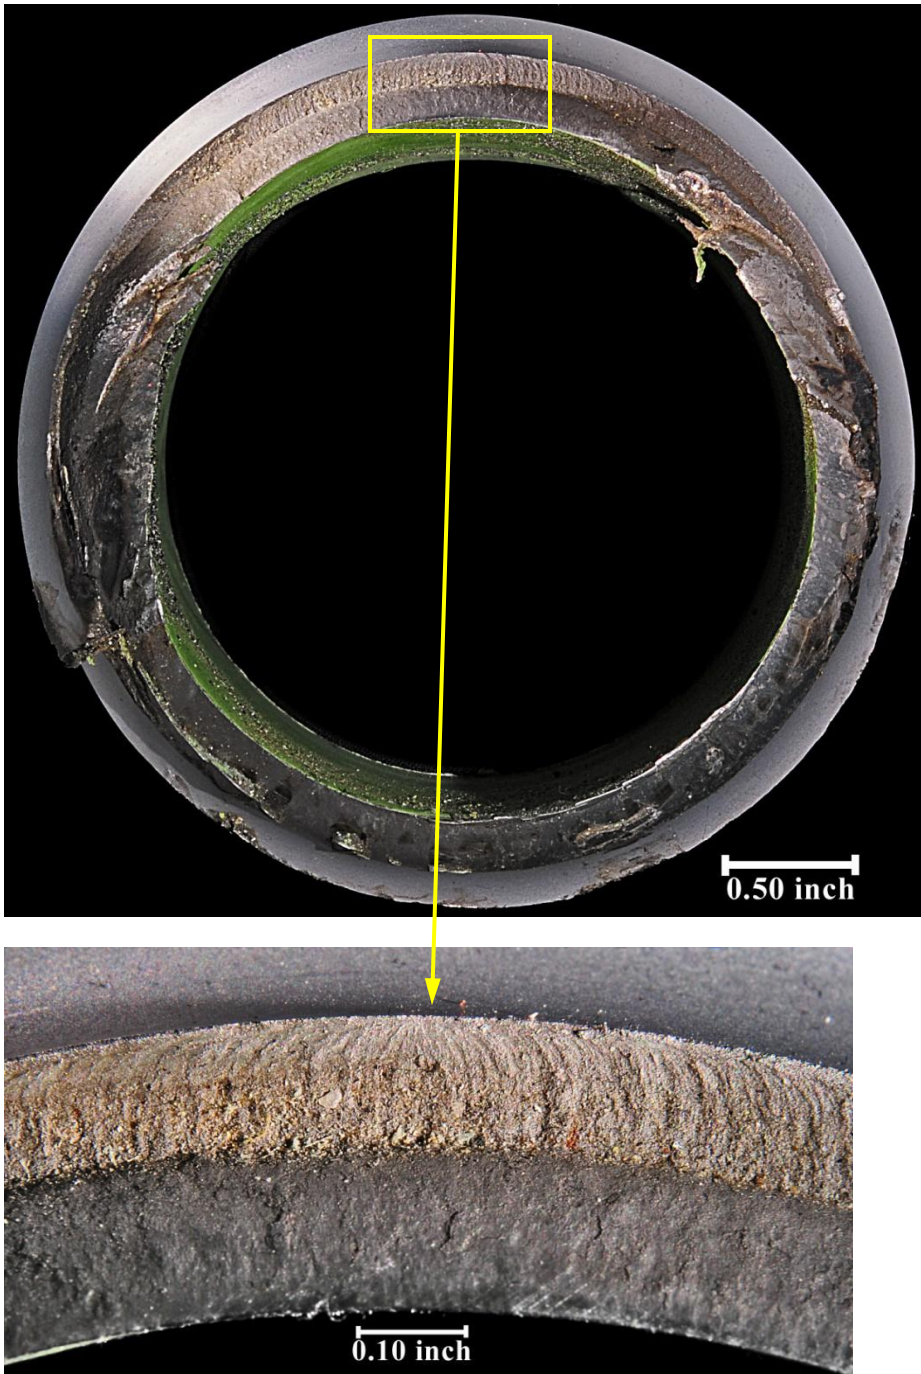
Images of the fracture surface of the mating half after cleaning. An origin can be seen on the OD at the root of a thread in the top of the images.
